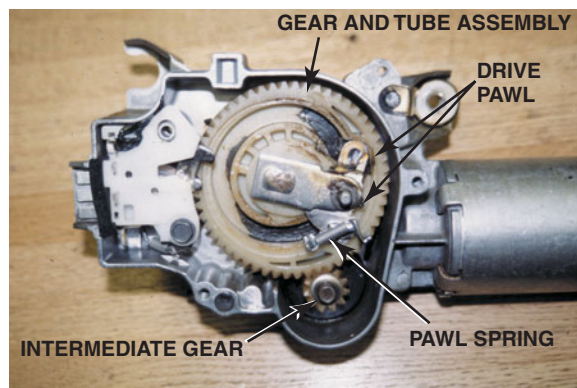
A typical wiper motor with the housing cover removed. The motor itself has a worm gear on the shaft that turns the small intermediate gear, which then rotates the gear and tube assembly, which rotates the crank arm (not shown) that connects to the wiper linkage.
